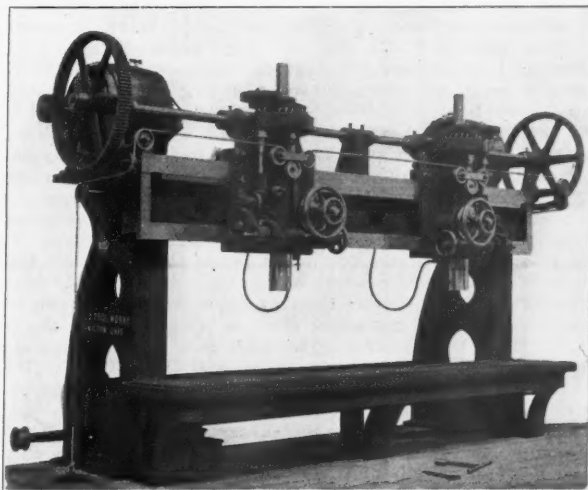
Niles-Bement-Pond Locomotive Rod Boring Machine.
